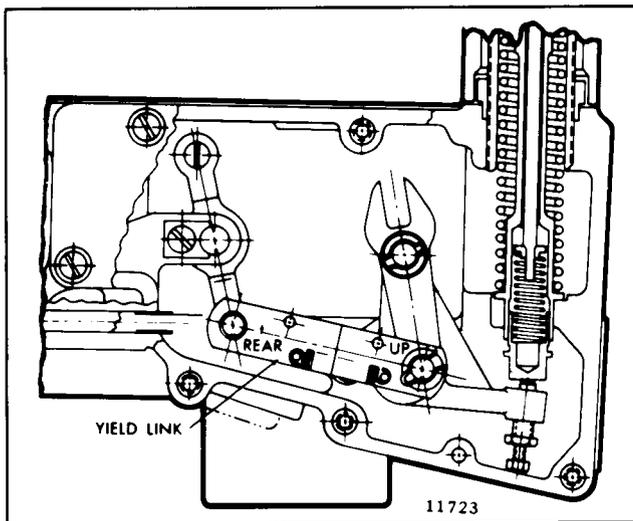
Throttle Delay Yield Link (8V-53 Engine)
